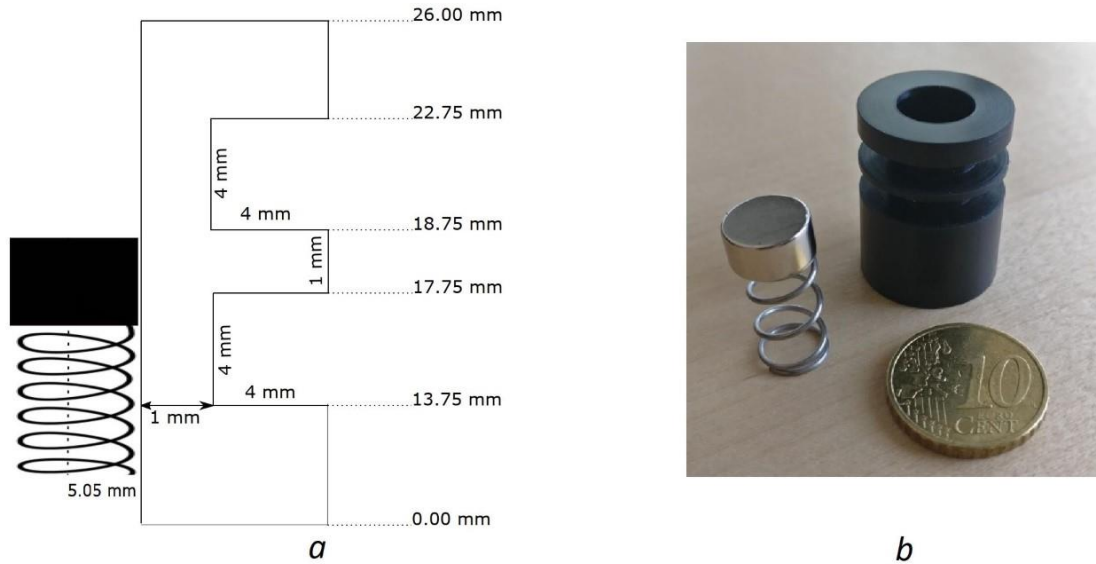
Prototype dimensions (a) and a magnet on spring and a frame (b)
